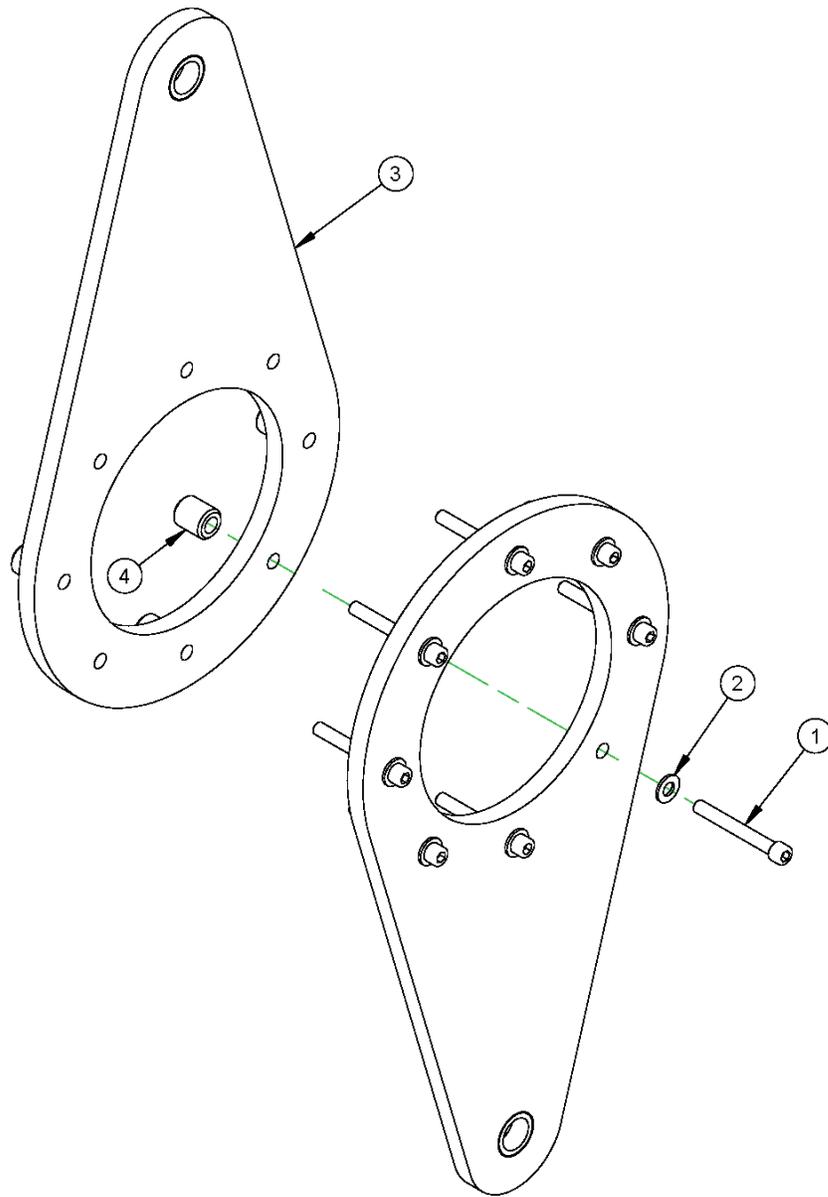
BORING DIAMETER RANGE STACK-UP BLOCKS ASSEMBLY PARTS LIST (P/N 81249)
